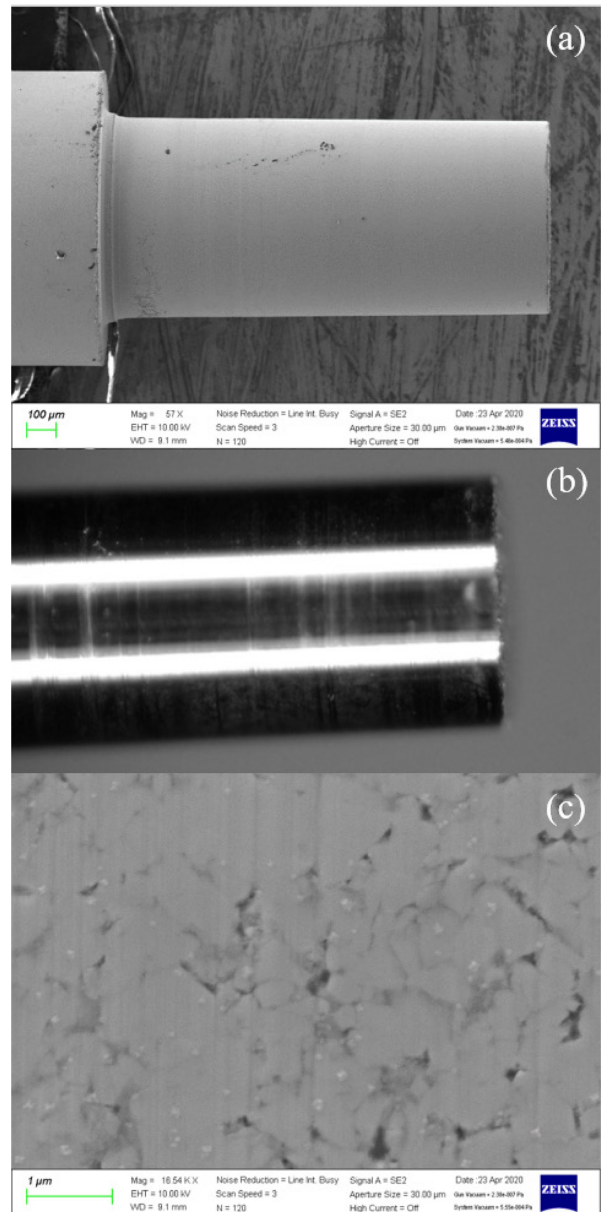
(a) SEM image of micro pin fabricated by PCD mechanical machining, (b) Optical image and (c) SEM image of the machined surface
